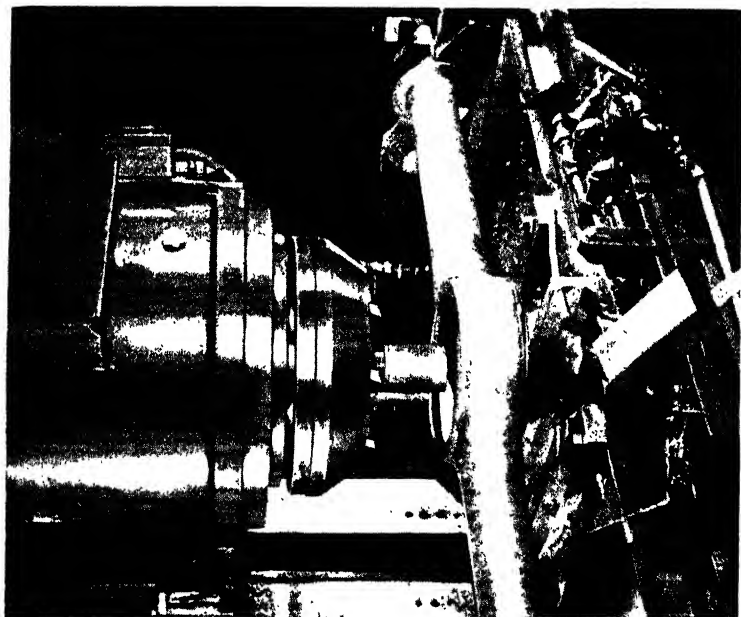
Face-milling Banjo Faces of Rear-axle Housing
